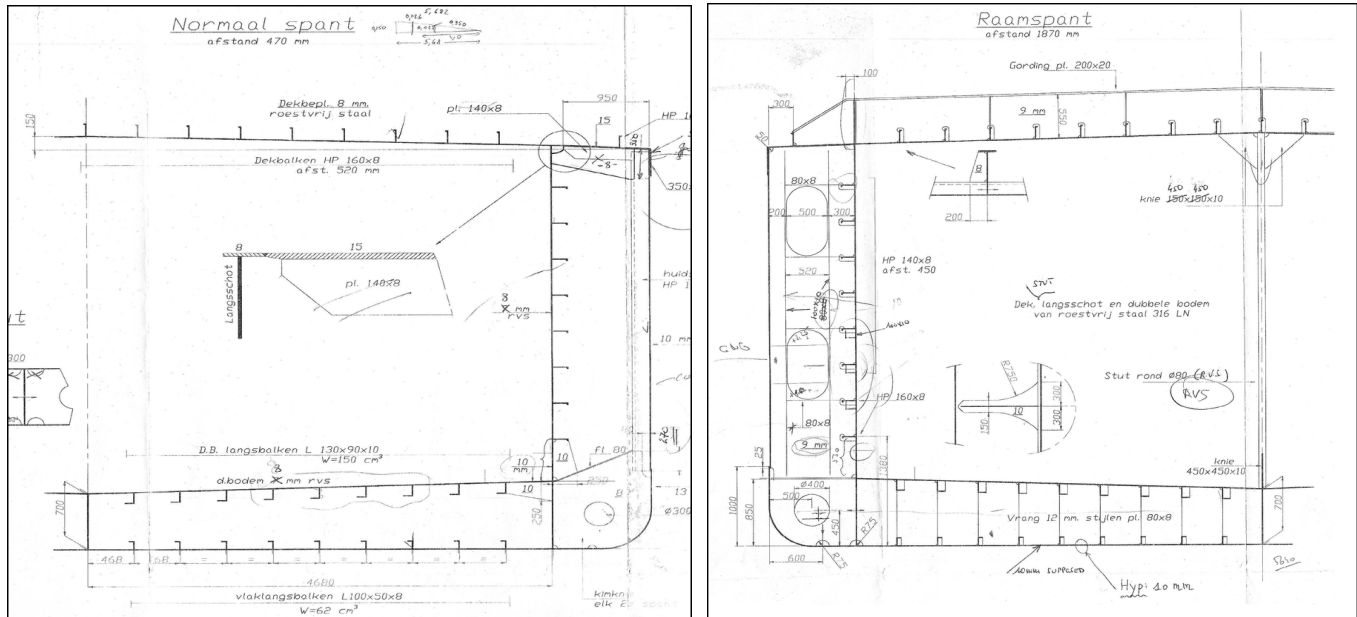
Typical Midship Section (Normal Frame) and Web Frame
